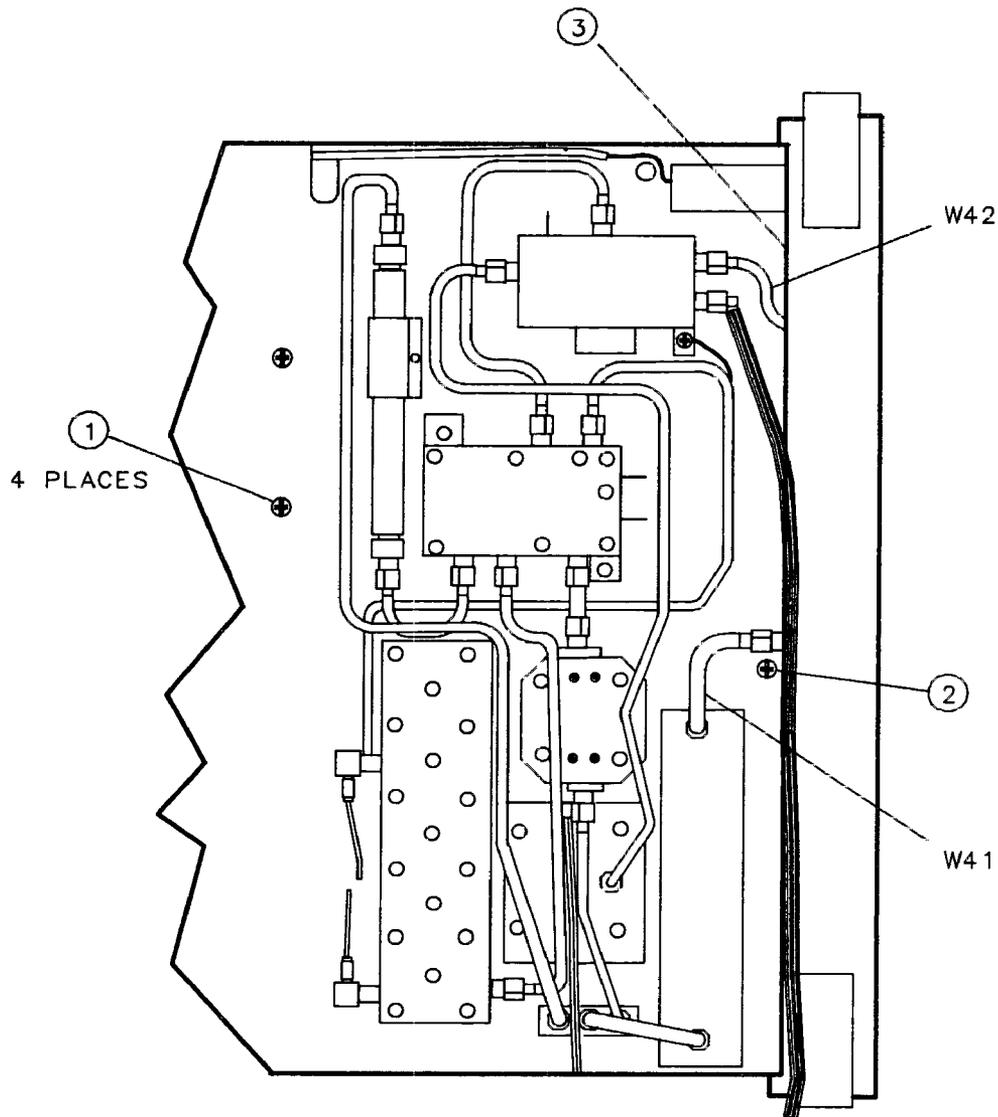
A9, A18, and Line-Switch Assembly Mounting Screws
